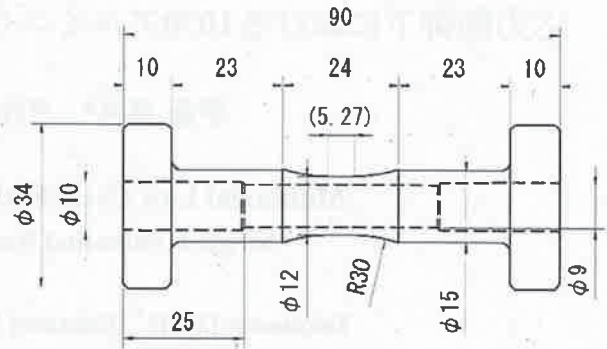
Shape and dimensions of hollow cylinder specimen tested (mm).
